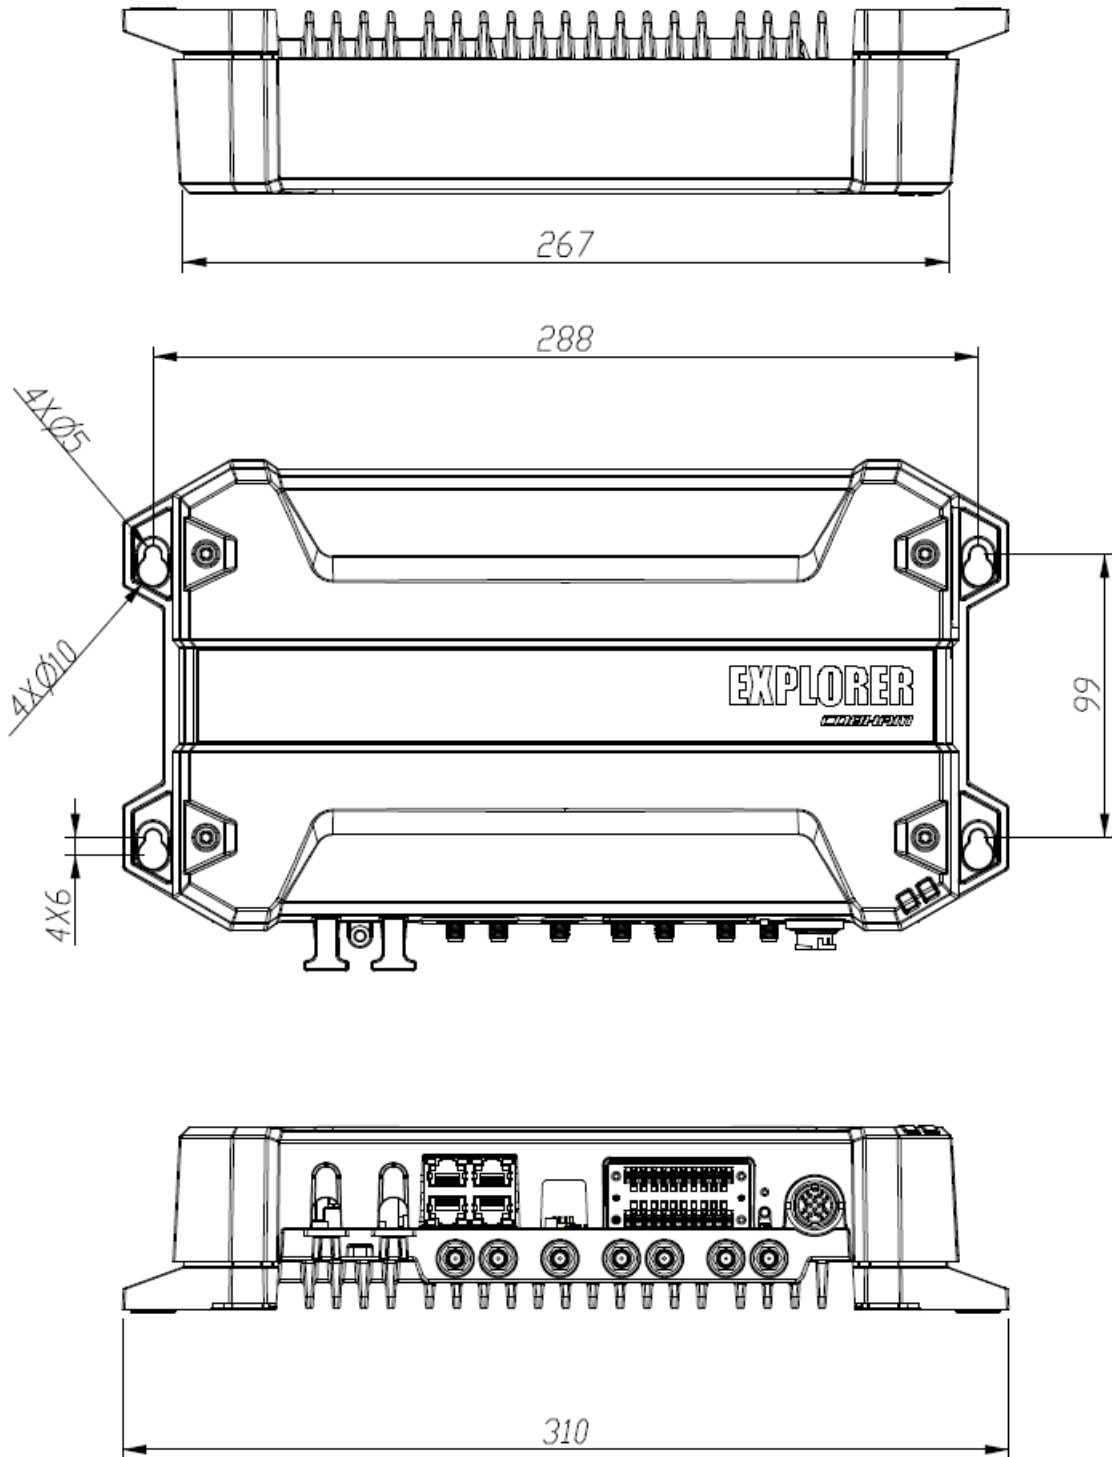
Outline drawing with dimensions, front, top and bottom
